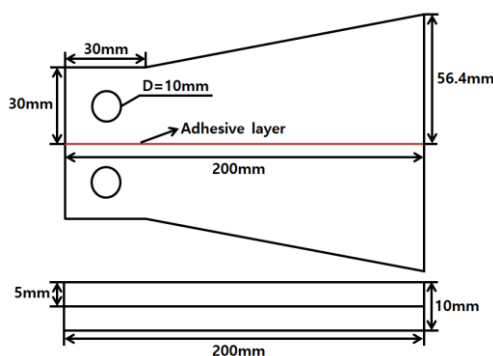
Dimensions and configuration of tapered double cantilever beams
